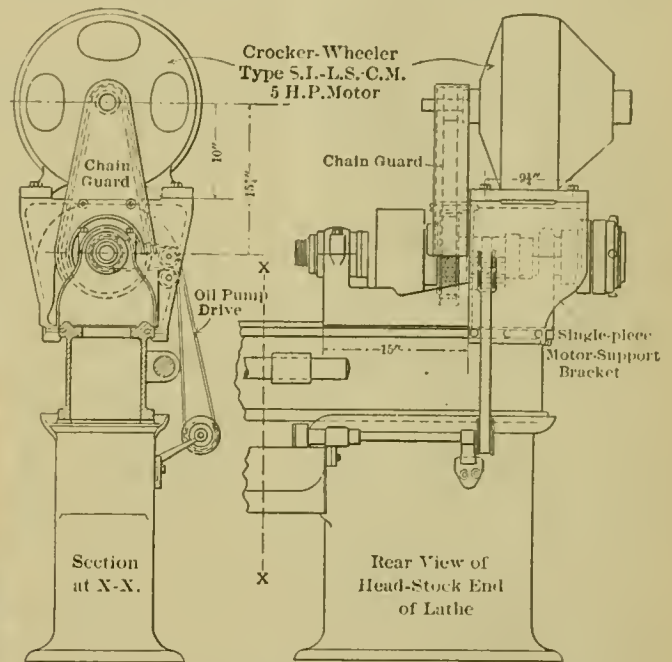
DETAILS OF APPLICATION OF THE INDIVIDUAL DRIVE TO THE JONES & LAMSON TURRET LATHE, SHOWING SPECIAL ONE-PIECE MOTOR SUPPORT.
